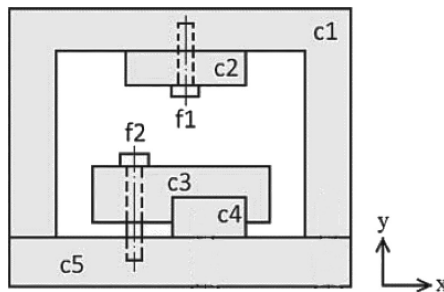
An assembly example after the disassembly of f3 and f4 (refer to Fig. 1).
